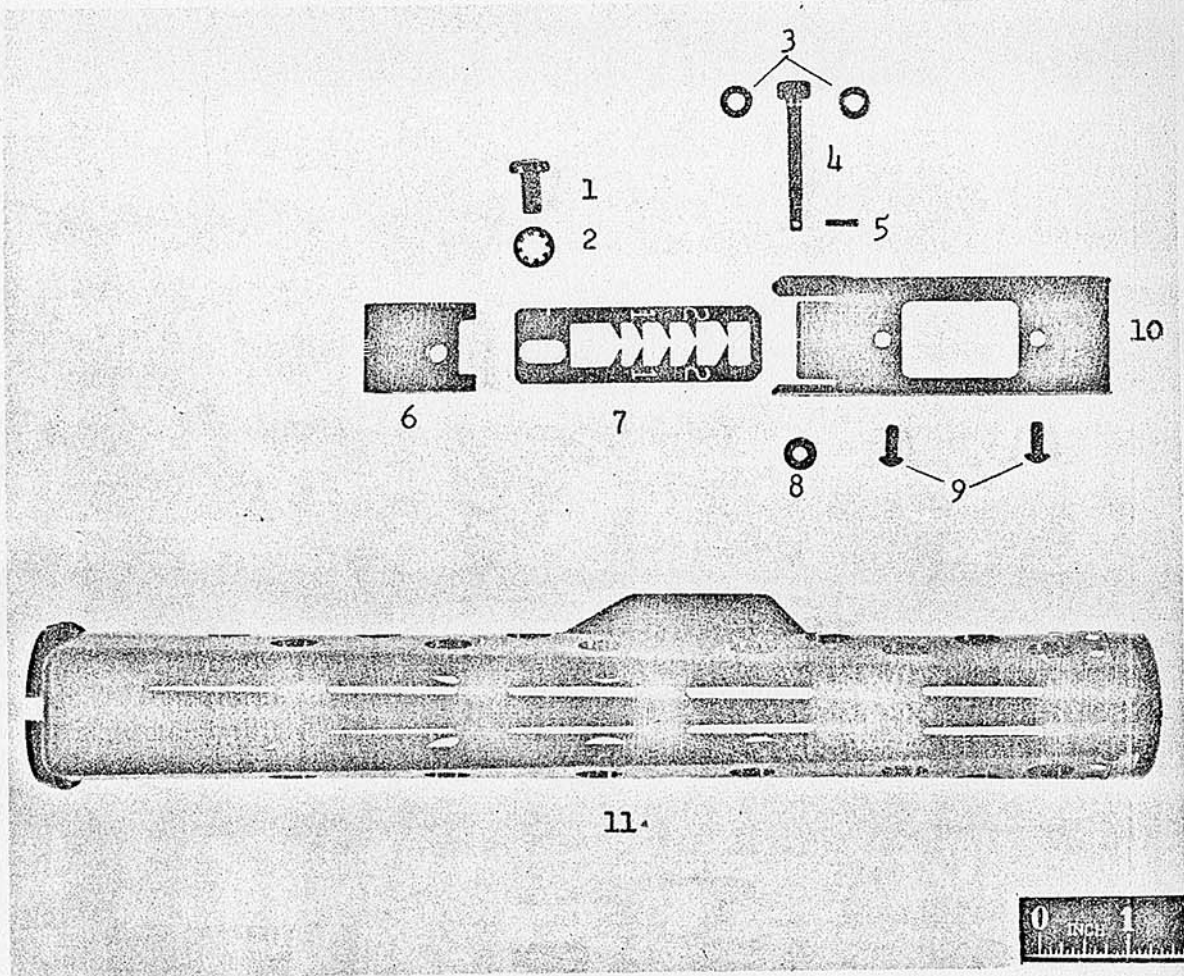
Disassembled View of Cover and Battle Sight for XM203 Grenade Launcher
